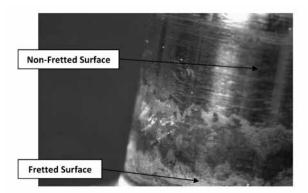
Example of a Fretted Surface in a Modular Hip Component
